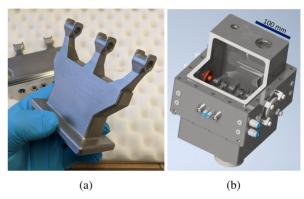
Overview of the cavity geometry and printed parts. (a) 3D printed girder drift tube structure. (b) Cross section of the assembled cavity model.
